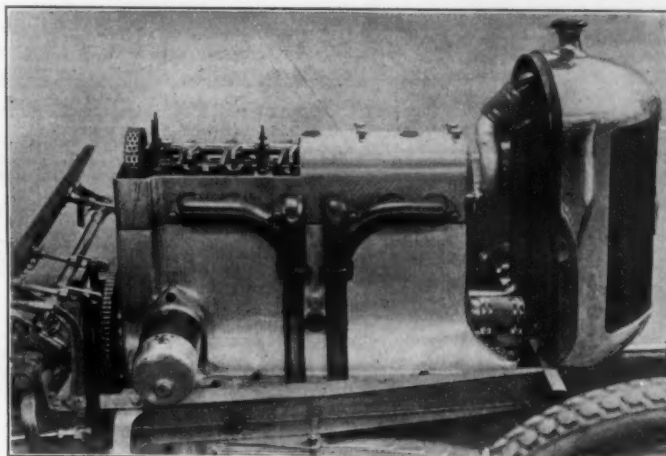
BRITISH A. C. ENGINE WITH CHAIN-DRIVEN OVERHEAD CAMSHAFT
